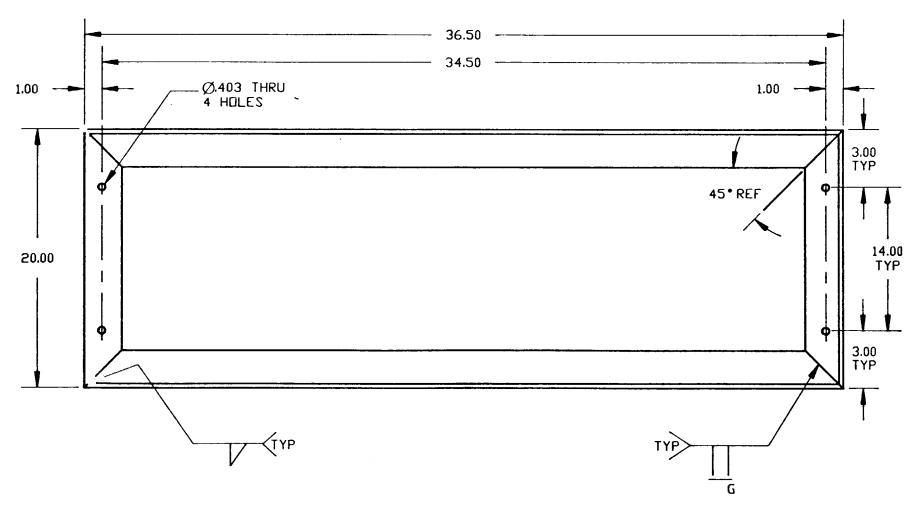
Tool Box Rack Assembly Part Number 20089720-4 (Sheet 4 of 11)
